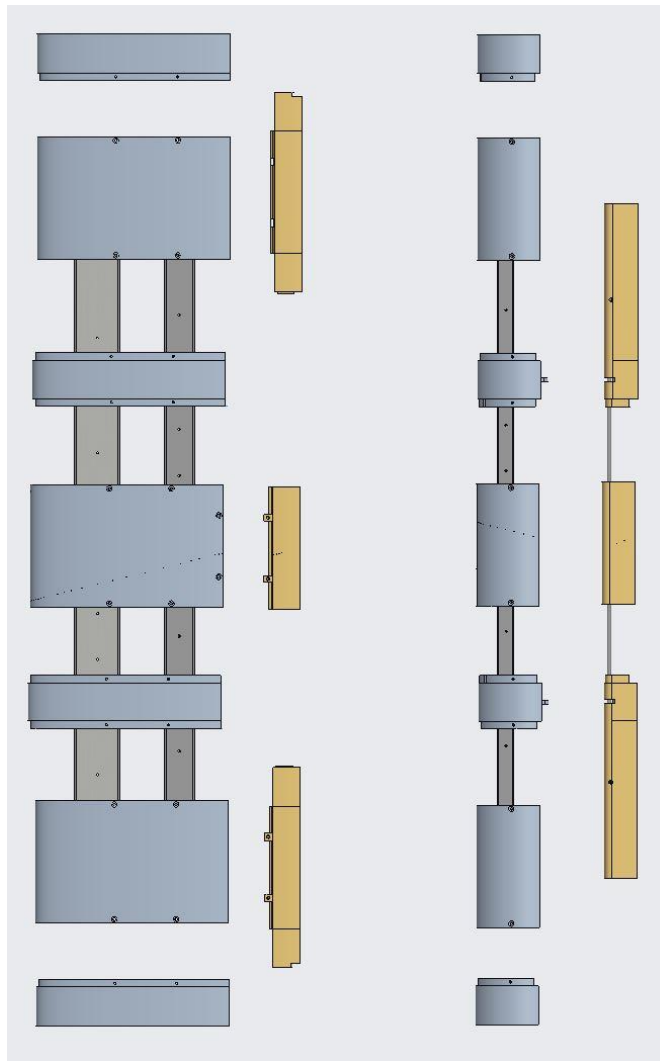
Exploded view of the S414 airfoil model. Aluminum parts are depicted in light gray, steel spars in dark gray, and the 3D printed parts in gold.
